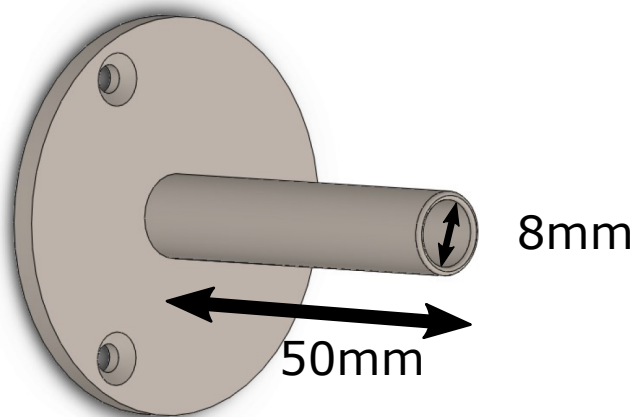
Drawing representation of the differential pumping tube along with its dimensions.
